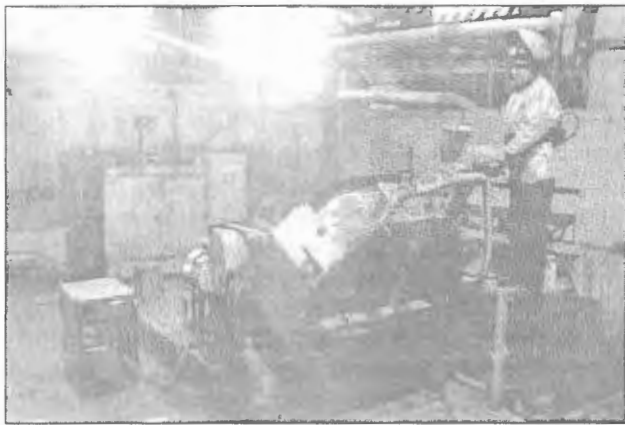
Furnace-manipulator for welding sections for rolls of 650–852 mm diameter
